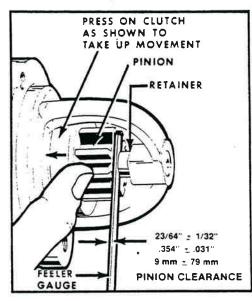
Checking Pinion Clearance (40MT & 50MT).
